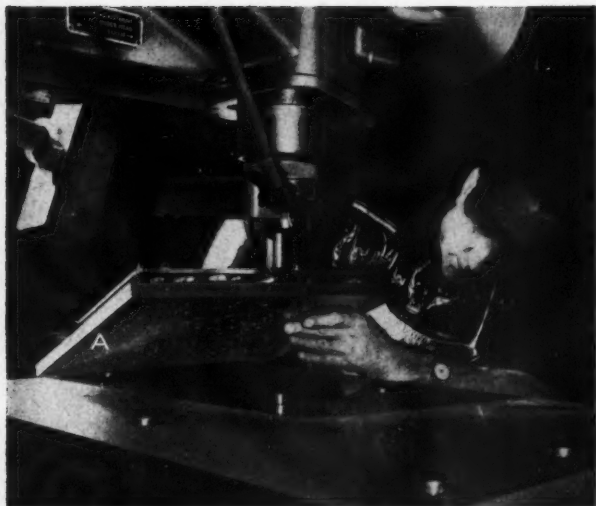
View showing the bored fixture plate *A*, and the location pin in the auxiliary table
